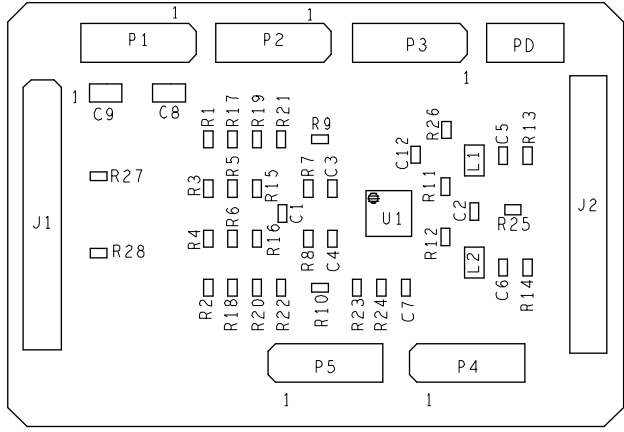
AMC-ADA4945-1EBZ Evaluation Board Assembly Drawing, Primary Side
